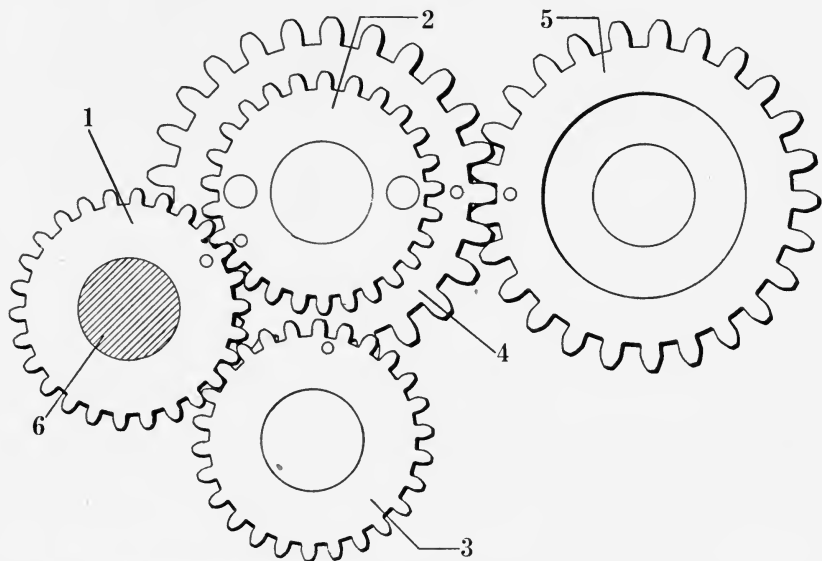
Assembly of Distributor Screw Gears shown in diagrammatic form, as used on single distributor Intertypes, and the means of timing them so the conveyor screws will run in unison. The arrow 1 points to the driving gear which is pinned to the clutch shaft 6; 2 is the upper front screw gear, and 3 the lower front screw gear, both of which mesh with the driving gear 1. It will be noticed that gears 2 and 3 do not mesh with each other. Attached to and forming a part of the upper front screw gear 2 is a larger gear 4, which meshes with and drives the back screw gear 5.
